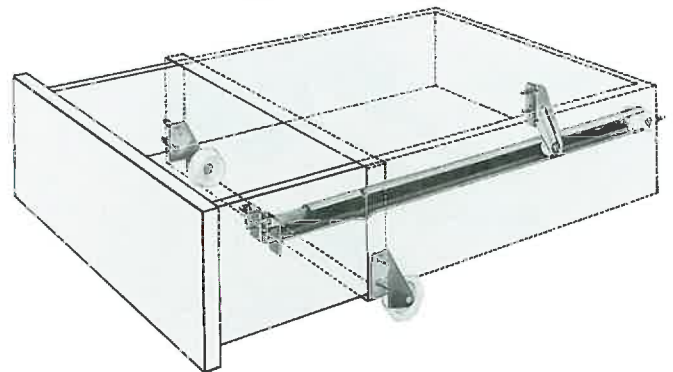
Most side mount drawer slides consist of two tracks. The forward roller, located on the cabinet track, supports the weight of the drawer. The rear roller, located on the drawer track, prevents the drawer from tipping forward when it is extended.
